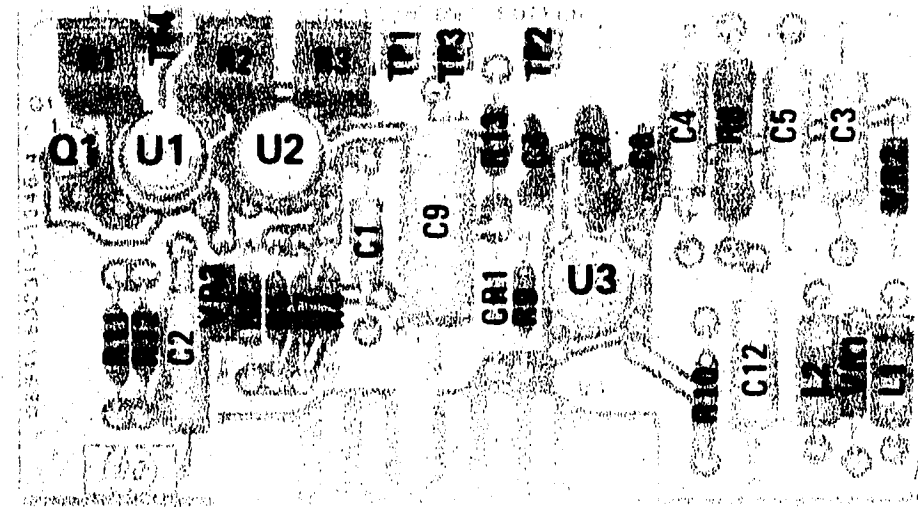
A2 Meter Detector and Drive Assembly Component Locations
